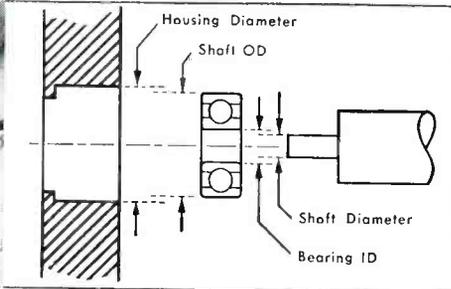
Principle factors involved in fitting Micro-Bearings Handling and fitting tools such as furnished by the Baker Co., Maplewood, Maine, enable operators to place or remove Micro-Bearings quickly, easily and help avoid damage.
